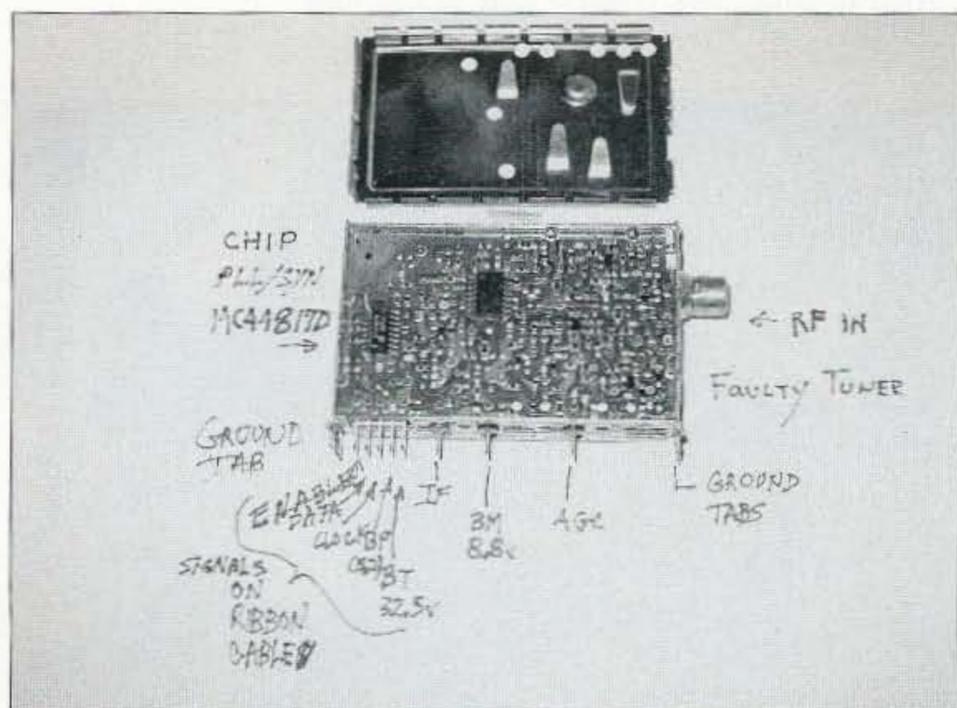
Photo C. All parts in the bad tuner are surface mount devices (SMD). I've marked this photo to show signals/voltages on three large pins and 5-pin header.
